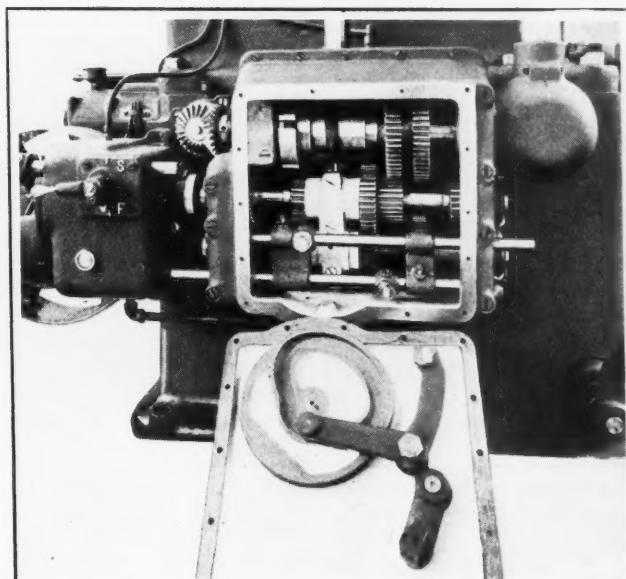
Feed-multiplying Gear-box on Left-hand Side of Machine
